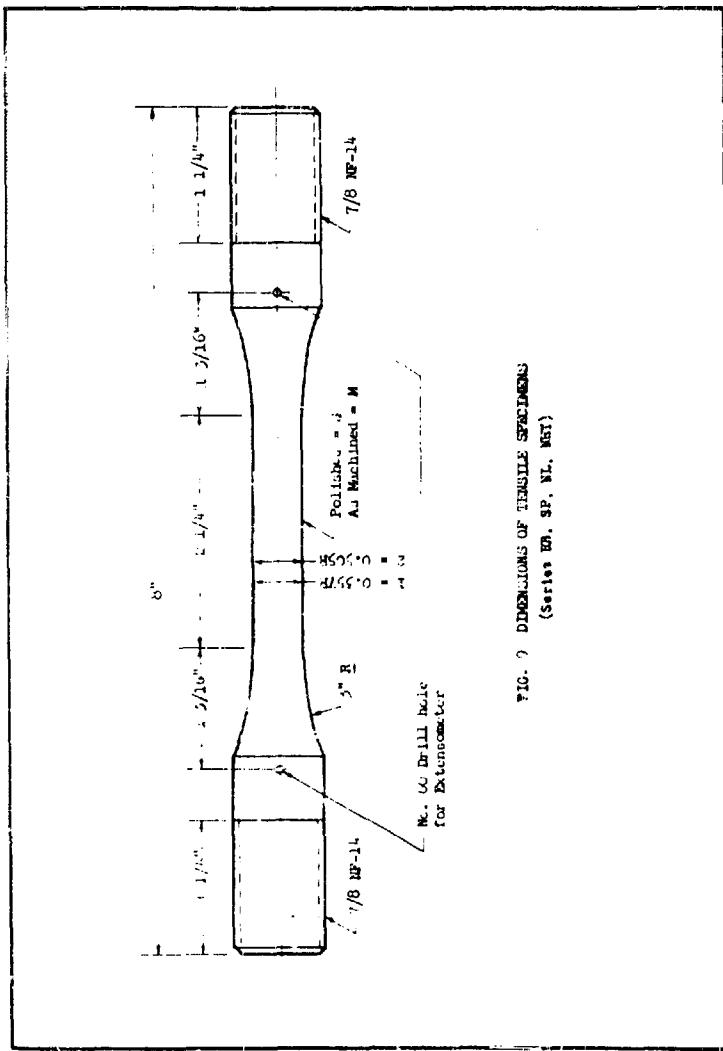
DIMENSIONS OF TENSILE SPECIMENS
